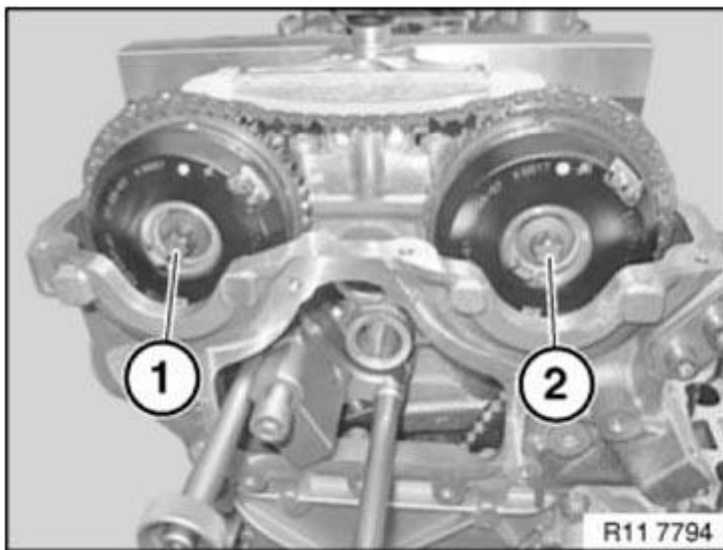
Identifying Central Bolts Of Intake And Exhaust Camshaft Adjusters
